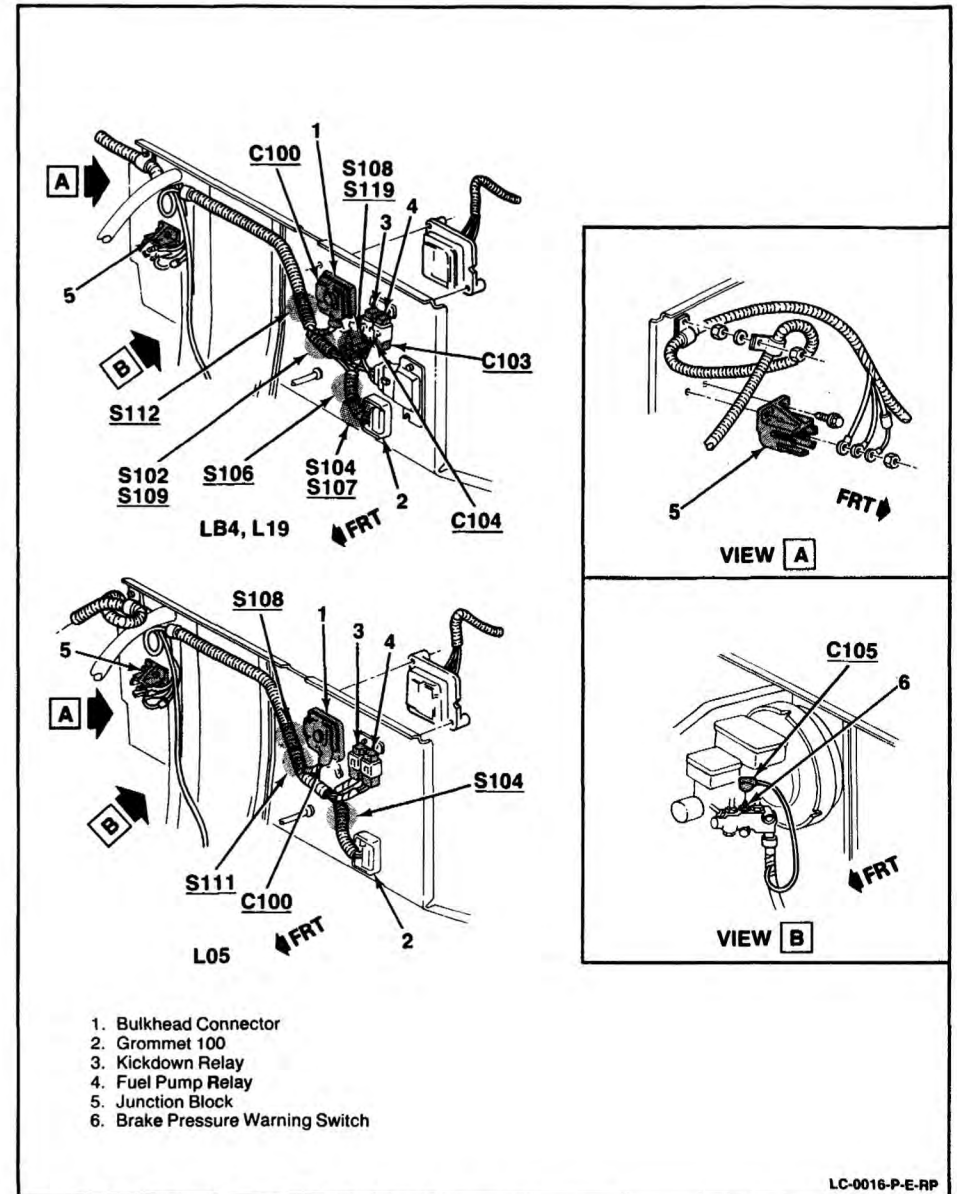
Engine Wiring Harness to Cowl (RPO LB4, L05, L19 w/P42)
